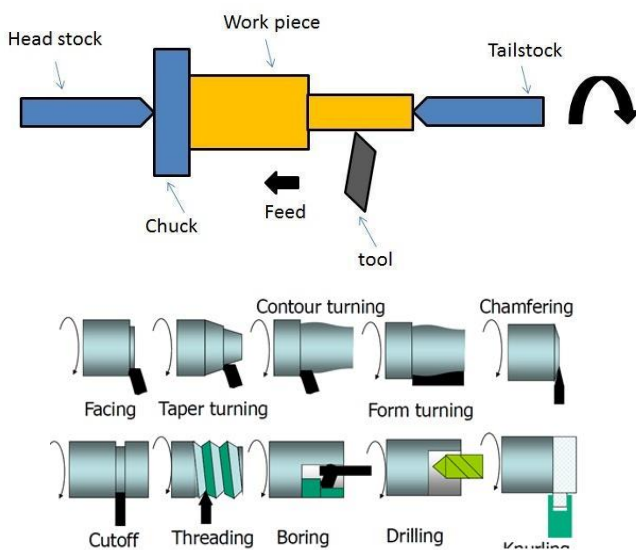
(a) Diagram of a typical operation using a lathe machine [12]; (b) Examples of various operations available on a lathe machine [13].
